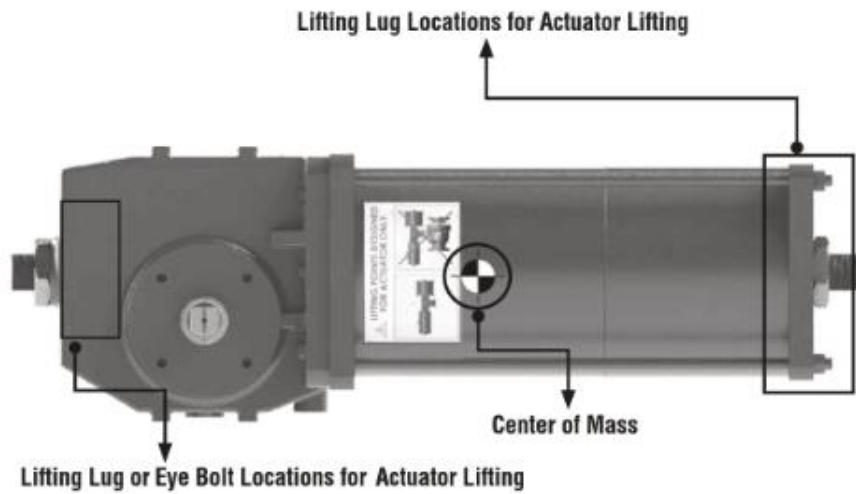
Single Acting Actuator Center of Gravity Position and Lifting Arrangement for LPC-05, LPC-10, LPC-12 and LPC-14
